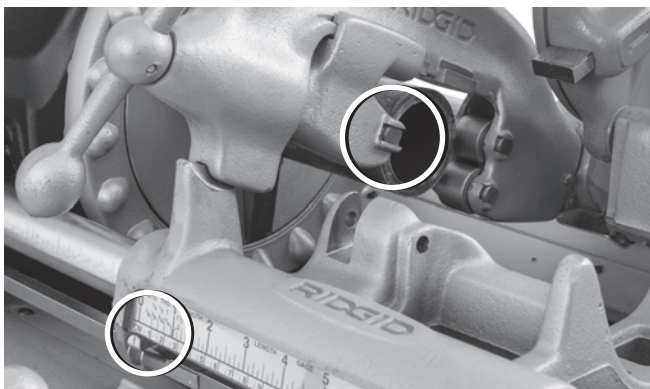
A – Cutter Wheel Blade Against End of Pipe. Set Pointer to Zero (0)
